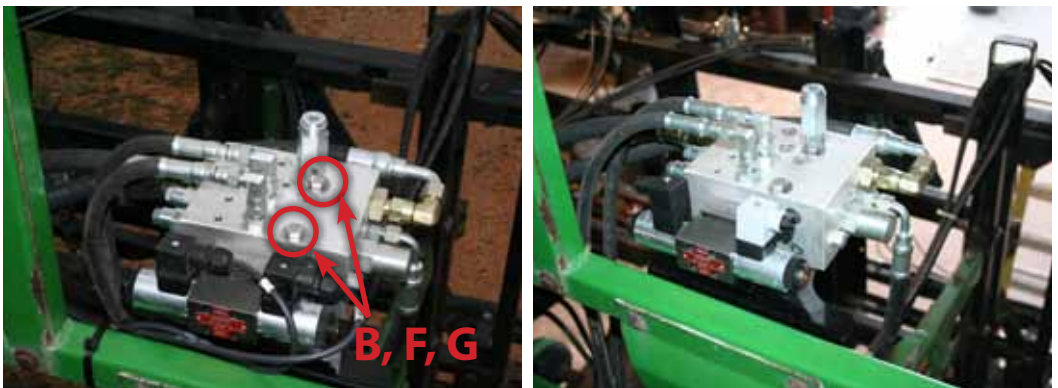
Install Mounting Bracket for FieldPilot Valve
